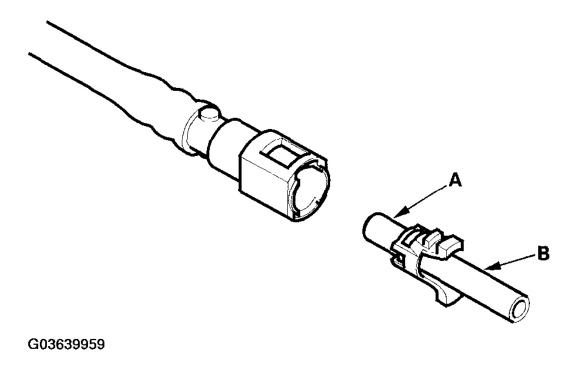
Checking Contact Area Courtesy of AMERICAN HONDA MOTOR CO., INC.
